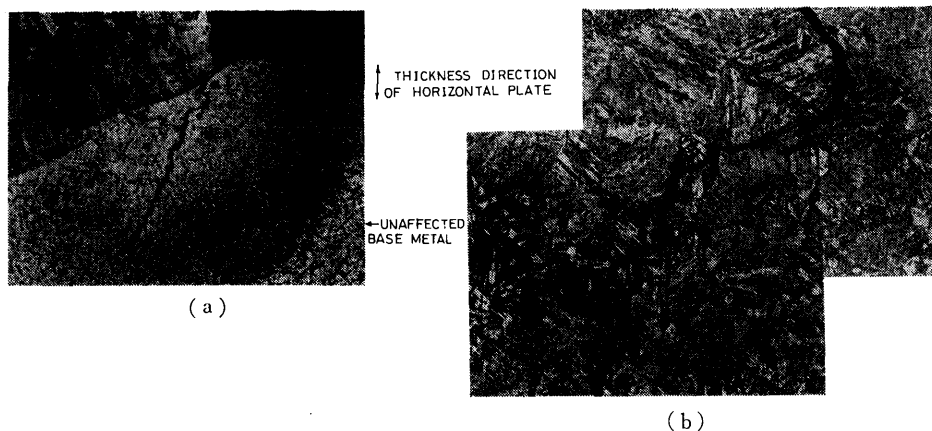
HAZ root crack developed in cruciform-shaped specimen of steel U38
